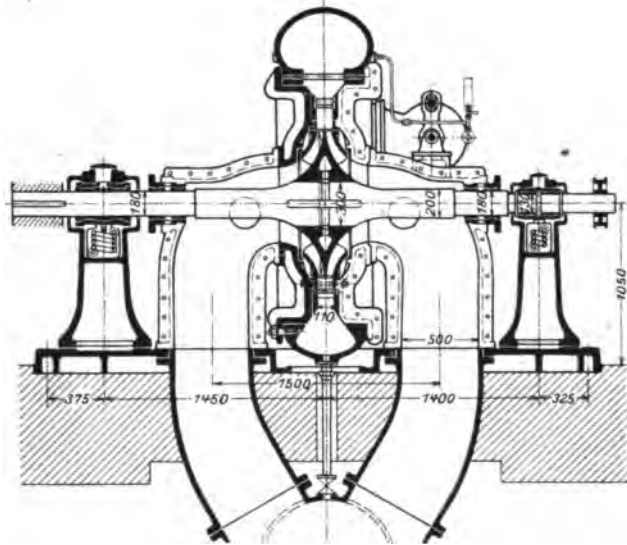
Cross Section of Turbine, Urfttalsperre Plant, Heimbach, Germany.
